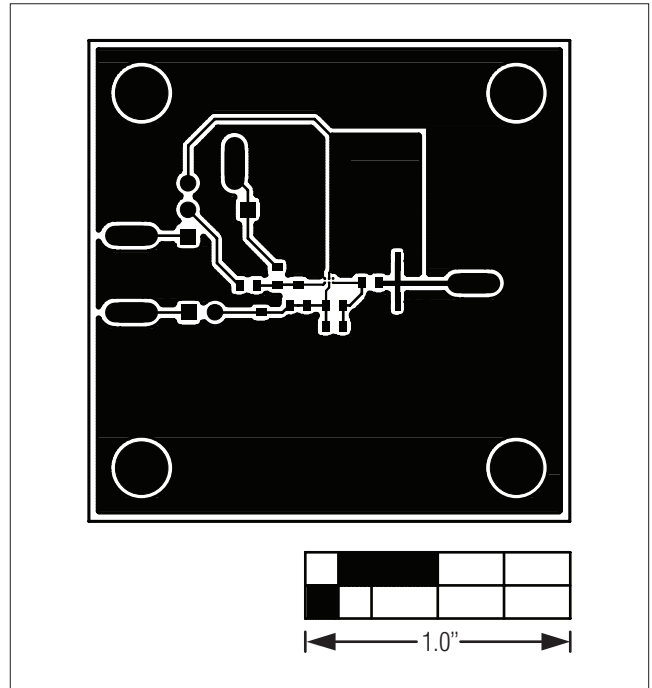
MAX4470 EV Kit PCB Layout—Component Side
